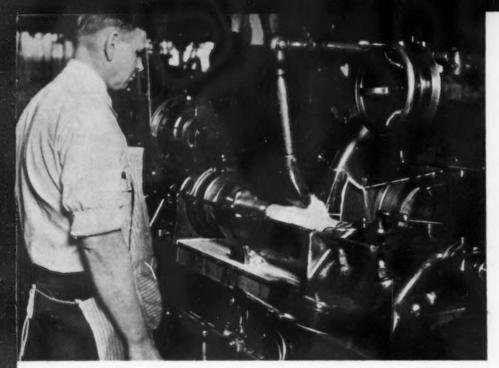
FIG. I—Rear axle housing tube mounted between centers in a hydraulic plain grinder for finishing several diameters. A 30-in. diameter 5-in. face wheel is employed.
